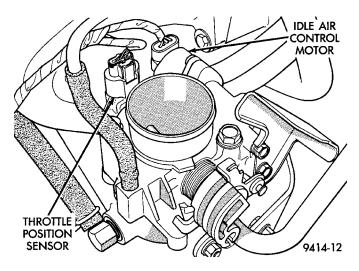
Idle Air Control (IAC) Motor and Throttle Position Sensor (TPS) Wiring Connectors and Vacuum Hose Connection
